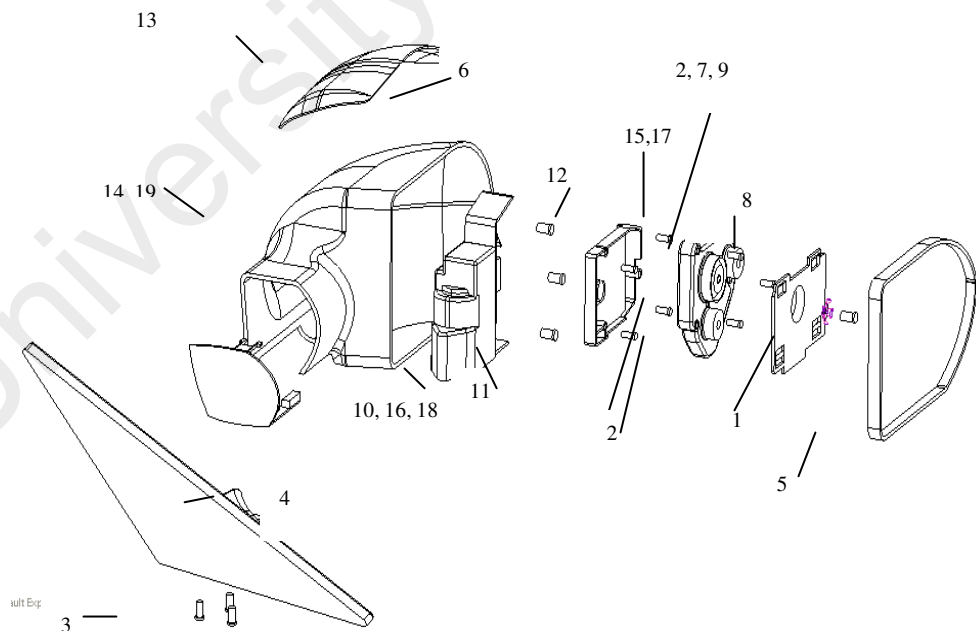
Exploded view of a Proton Waja car's side mirror.
